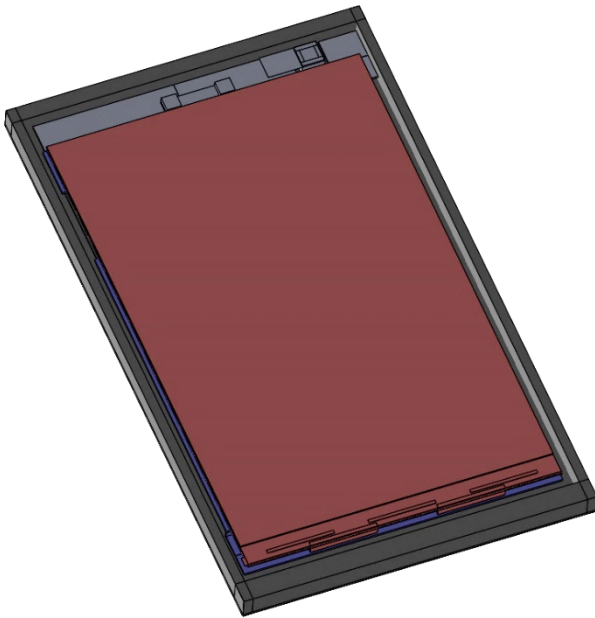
Orthographic view of the tablet model with front touch glass removed.
